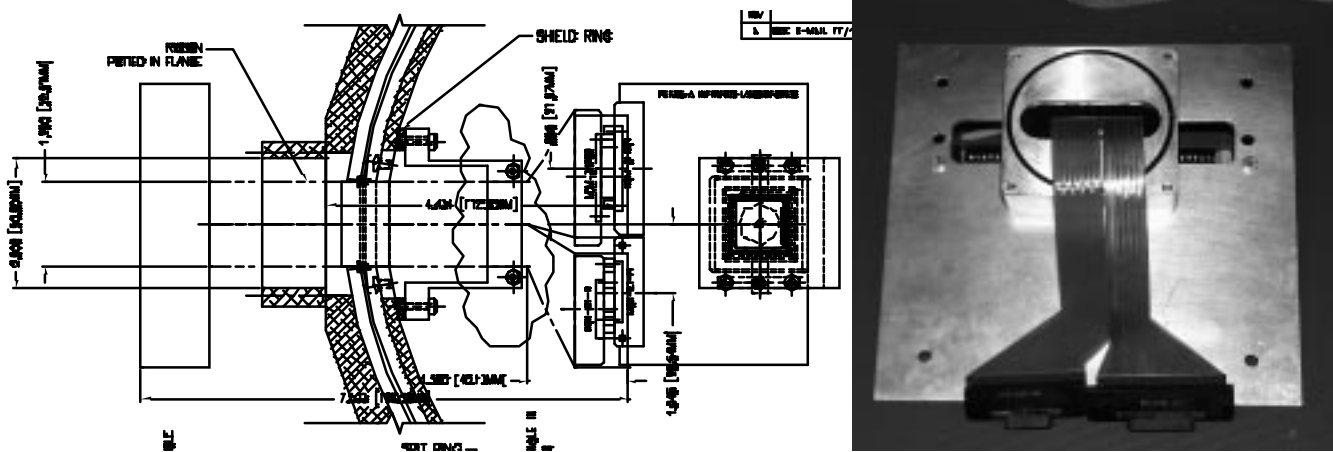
CFHTIR Fanout Board to Preamp Flex Circuit. *Illustrates the thermal tiedown mechanism, vacuum seal, and mechanical connection of the preamp to fanout board flex circuit.
